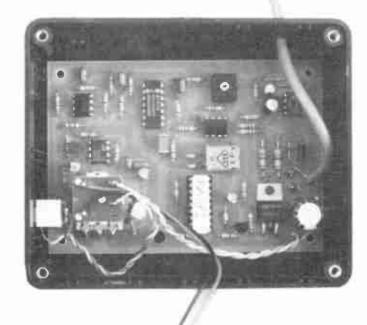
Printed circuit board design and layout for the Treasure Hunter.
